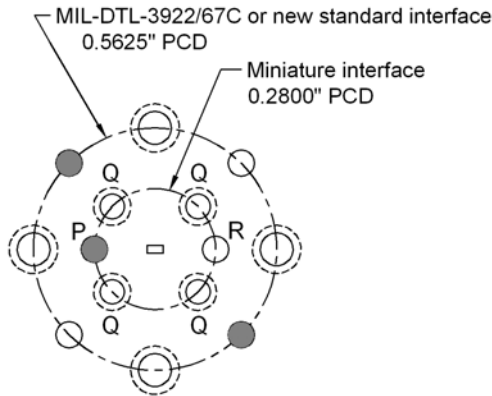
The Grammer miniature interface fits within the larger MIL-DTL-3922/67C pattern. Each side of the interface contains one captive pin (P) and a clearance hole (R) for the mating pin. The bolt holes (Q) can be either #2-56 or M2. Tolerancing for the miniature interface should follow that of the proposed larger interface.
